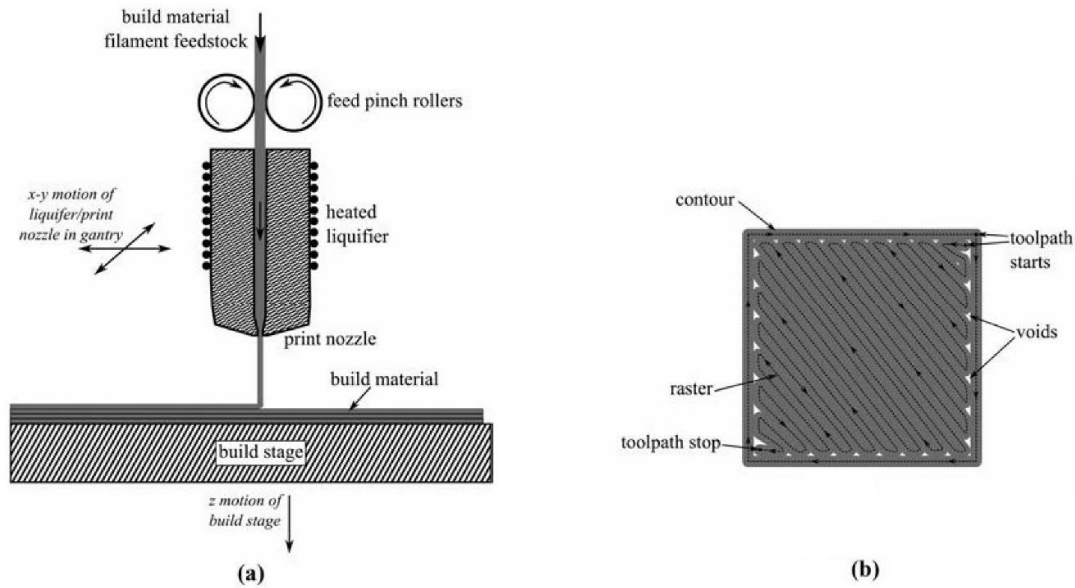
A schematic of a) material extrusion process, and b) a toolpath with one contour and internal raster for one layer [39].
